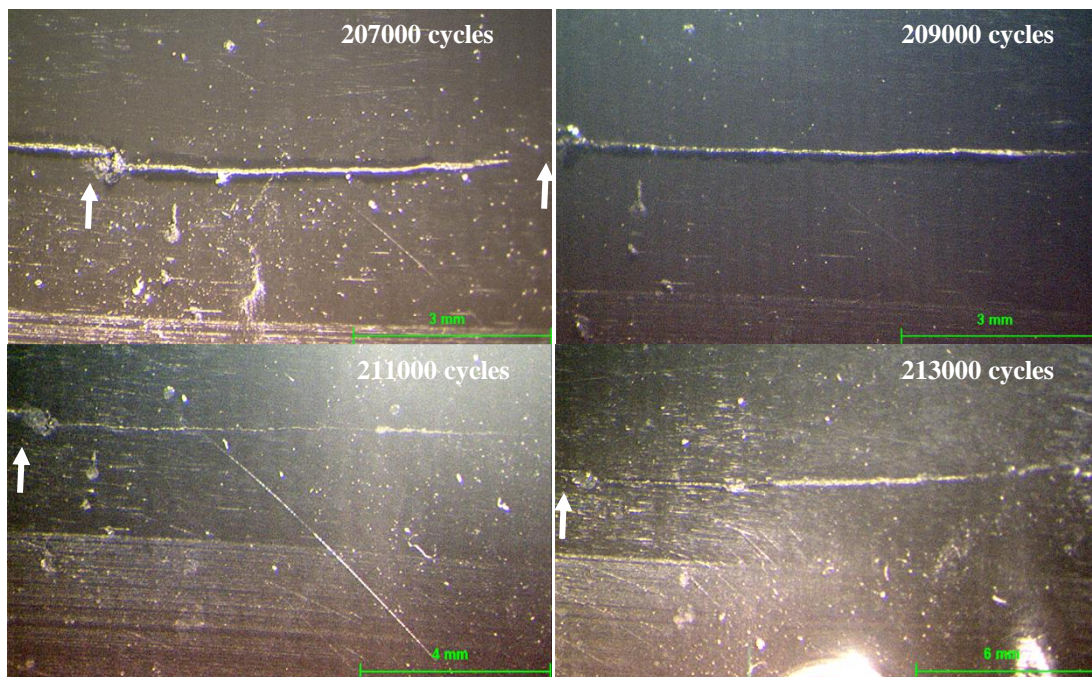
Larger scale fatigue specimen 1 - Fatigue crack propagation
